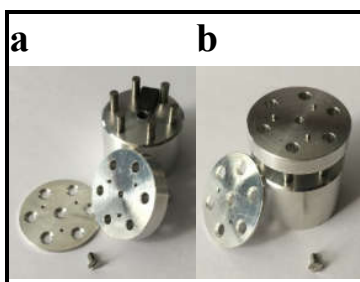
(a, b). Custom built TEM grid sample holder used in SEM. (a) shows the holder taken apart, and (b) shows the holder with the top piece taken off, the grids are placed on the top piece and the top piece is then fastened with the screw illustrated.
